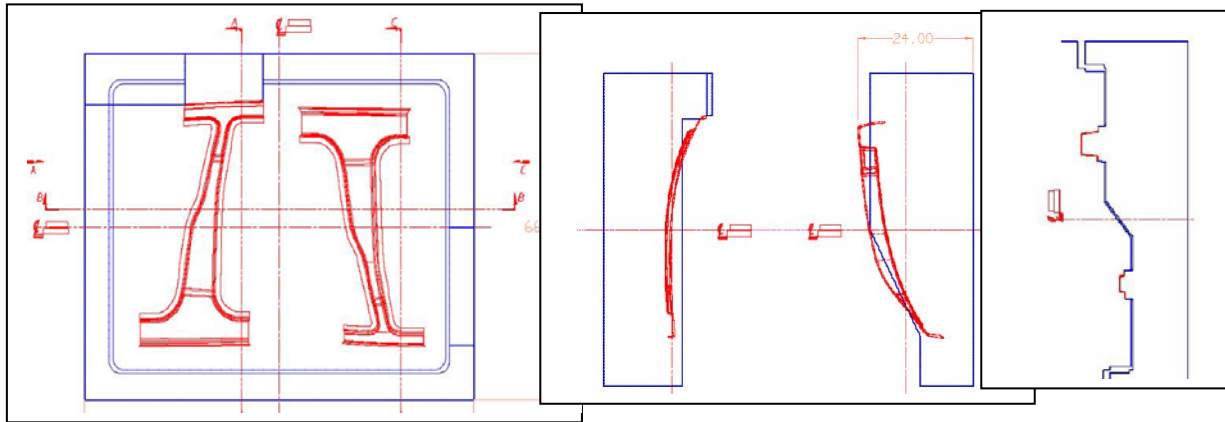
Drawing of the orientation of the B-pillar inner and outer panels in the mold.
